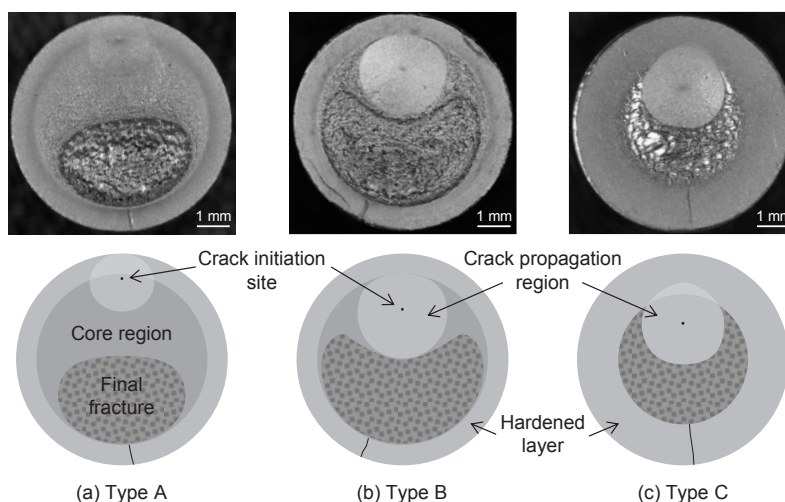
Macrographs and schematic illustrations of fracture surface.
